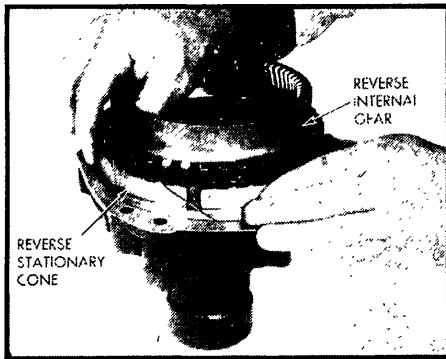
Removing reverse internal gear and stationary cone. 1951-52
